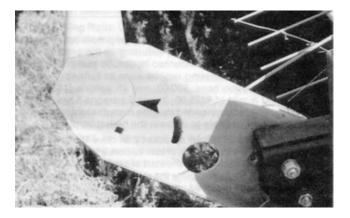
Cracks in Push Bar Mount Before Failure.
